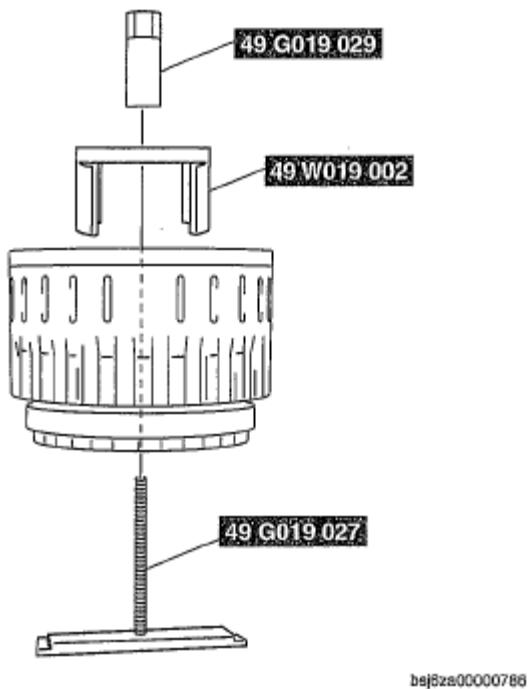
Identifying C2 Clutch Seal Plate And C2 Clutch Piston Return Spring
